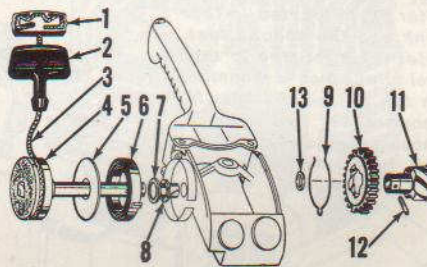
Exploded view of rewind starter. Cord (3) should be 45 inches long.
